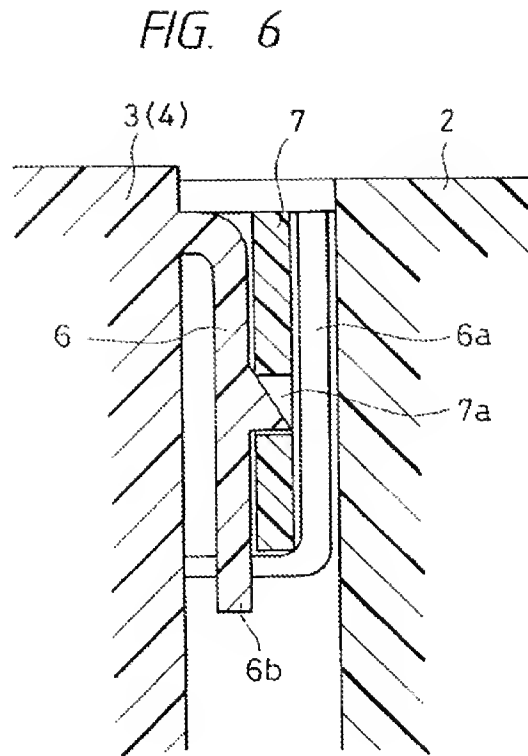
of Akiyama, illustrating side view of lock claw structure
